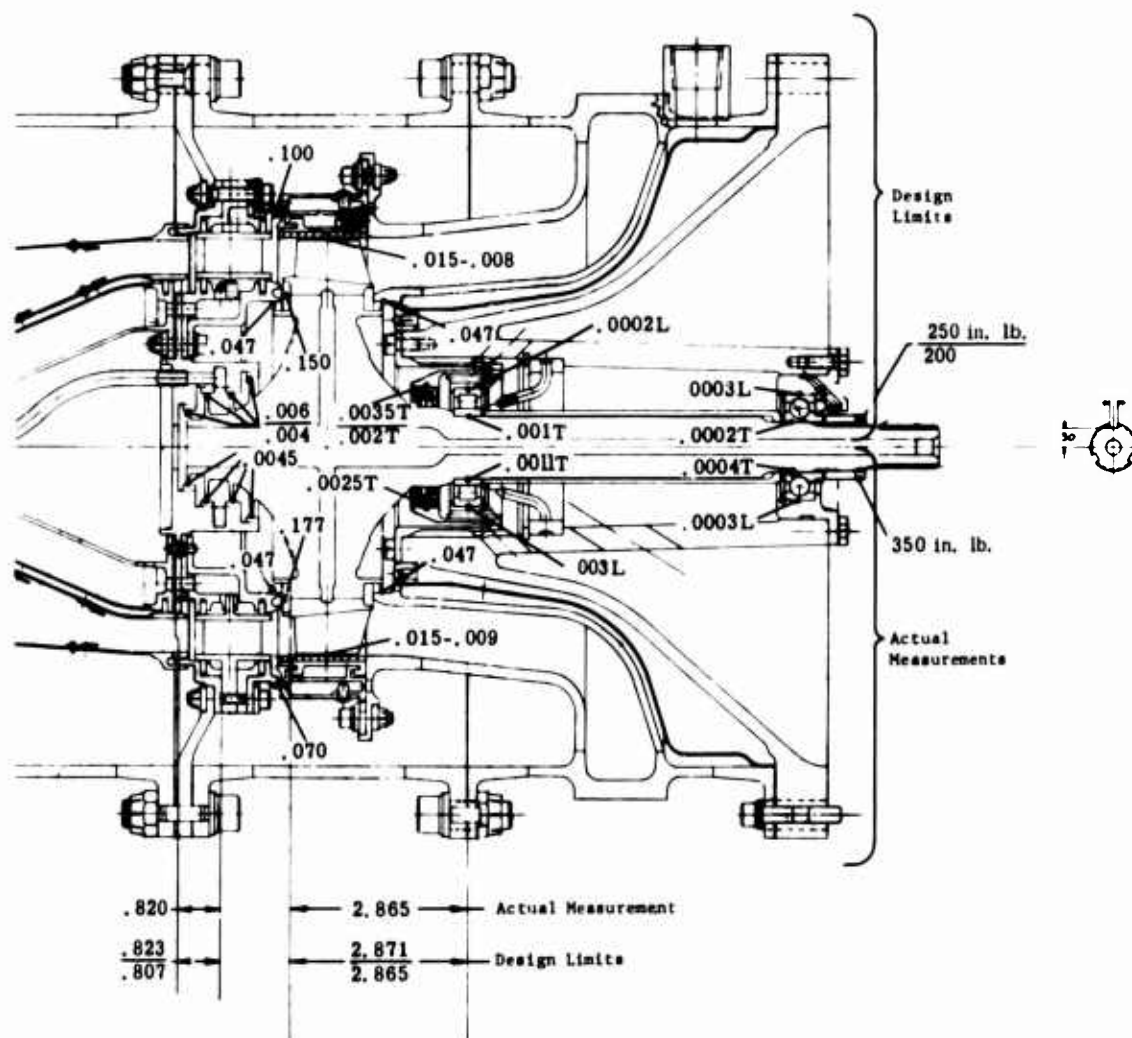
Actual Assembly Measurements - Rotor Build 5.
